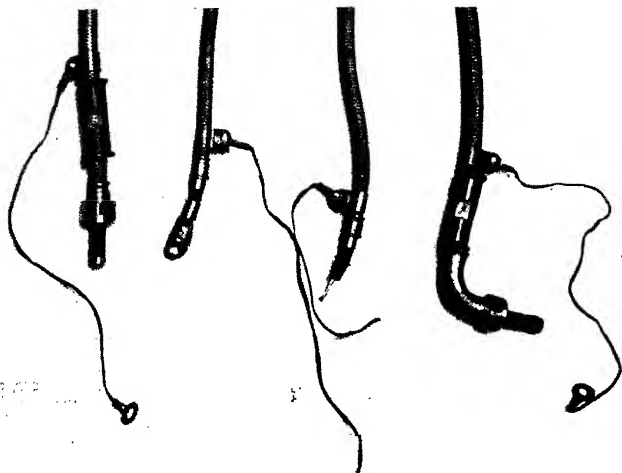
THE METHOD OF FINISHING OFF THE METAL-BRAIDED H.T. AND L.T. IGNITION CABLE.
